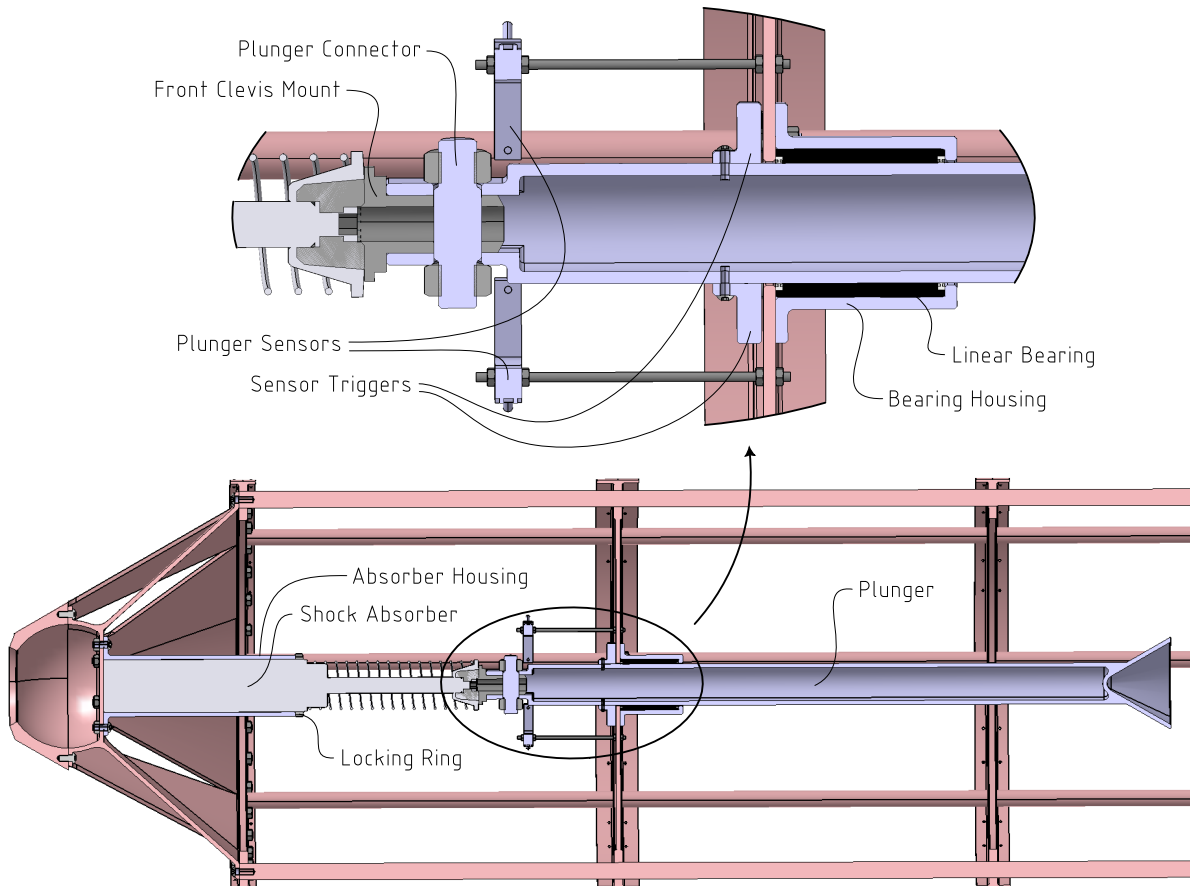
Cross-Section of the Shock-Absorbing Assembly Design and its Constituent Components. Note how the axial position of the plunger sensors can be adjusted using the threaded M4 mounting bars.
